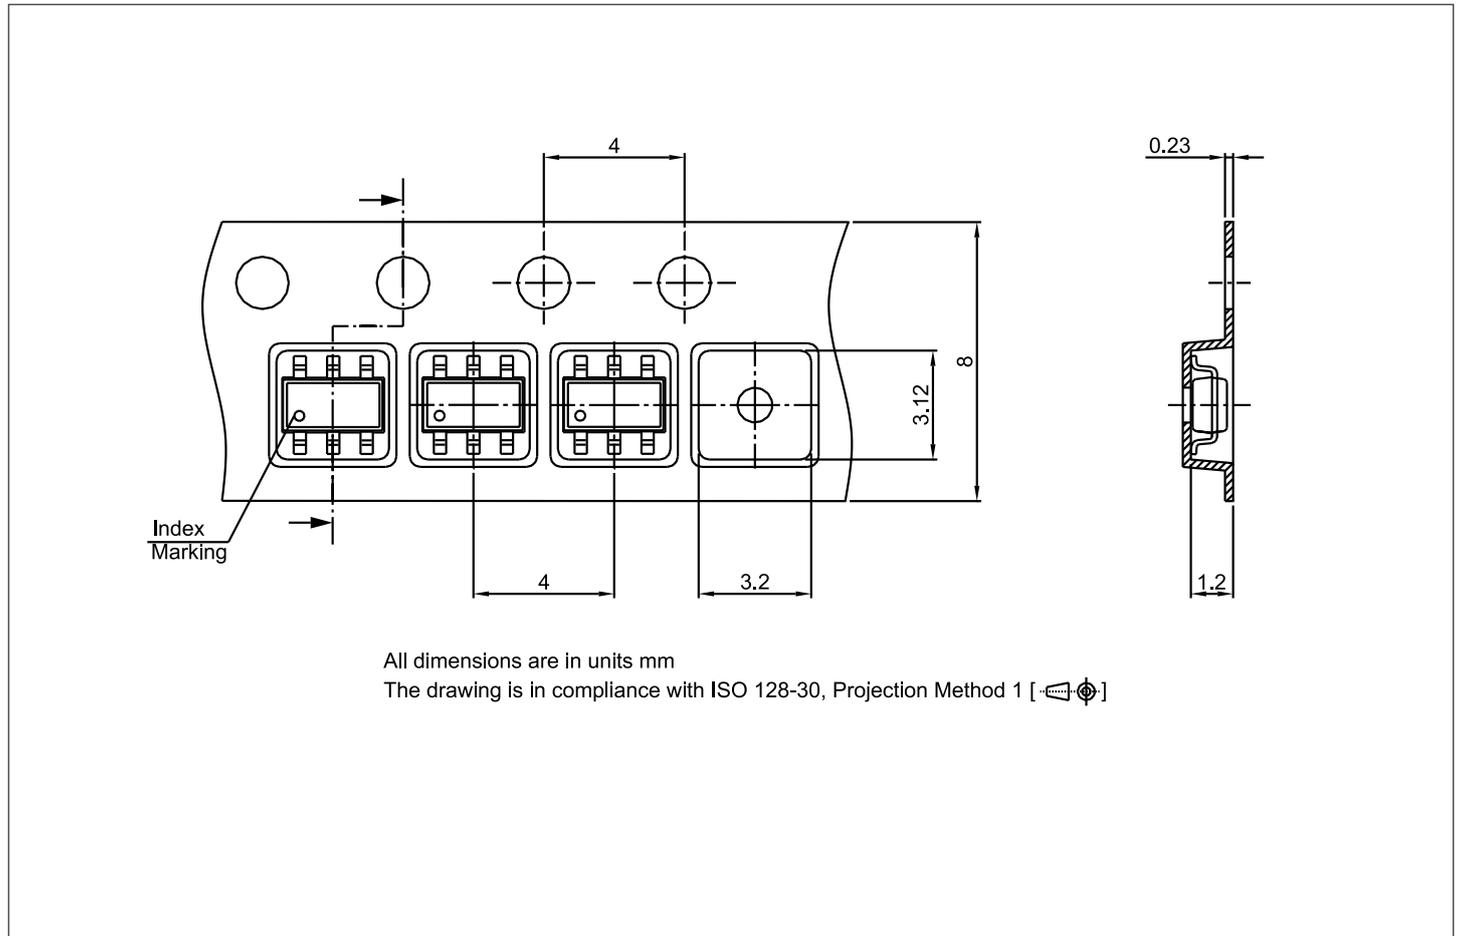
PG-TSOP6-6-8 carrier tape packaging
